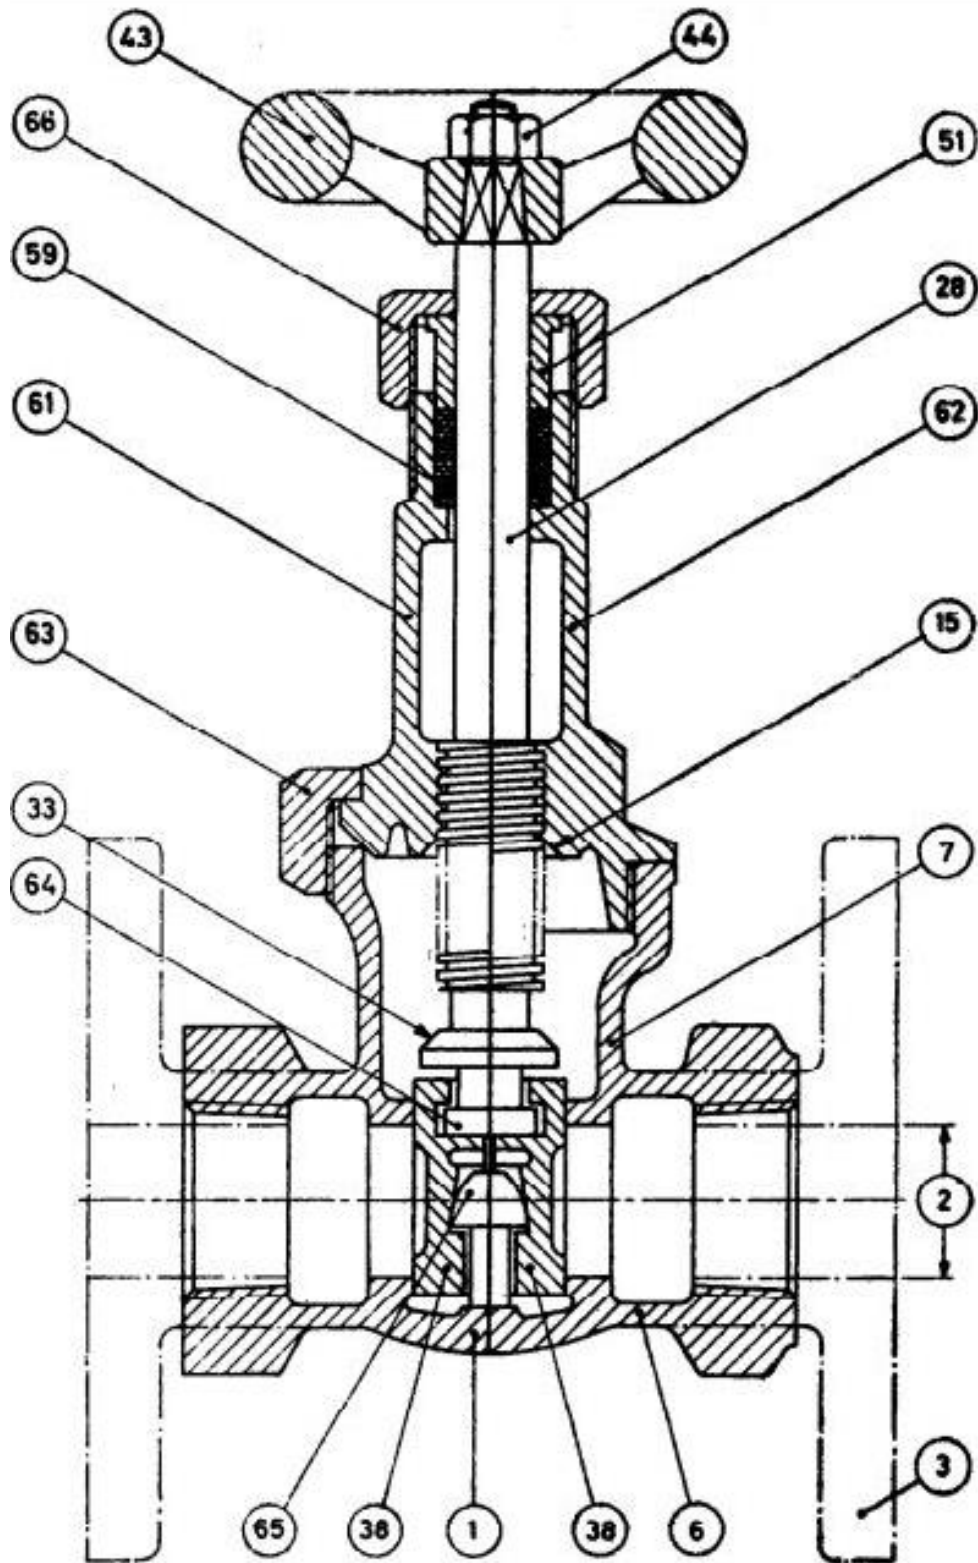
INSIDE SCREW, DOUBLE DISK, RISING STEM
